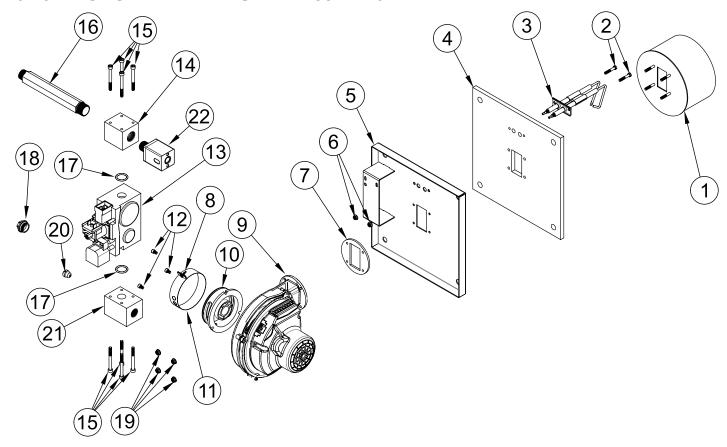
Exploded view of burner for Eolo modd. BC / NBC 85 \div 120 RT
